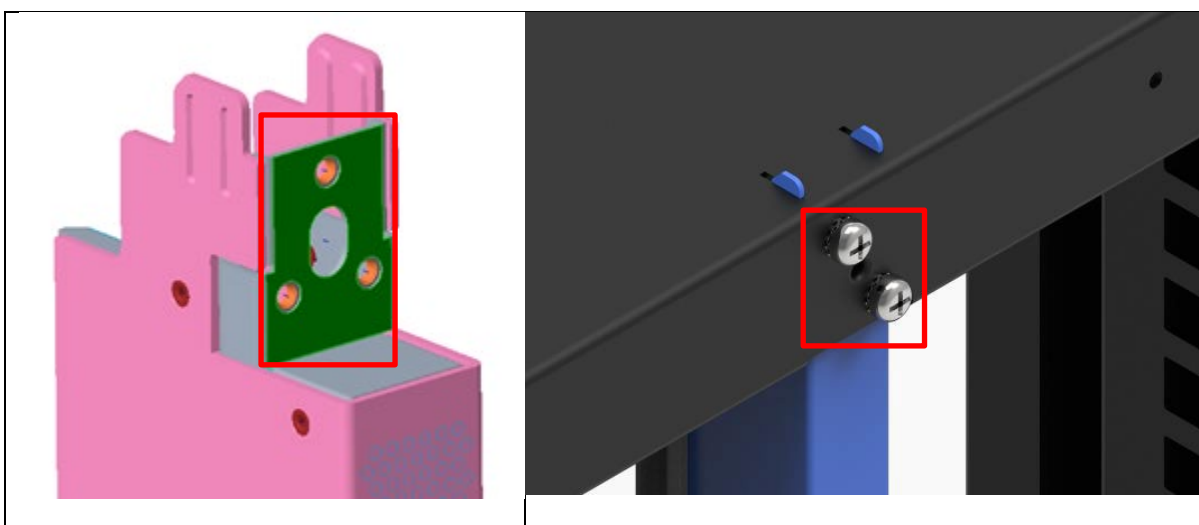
[Left] Busbar top mounting holes with masked section shown in green. [Right] Bolts with serrated washers mounting through the rack and to the masked section of busbar.
